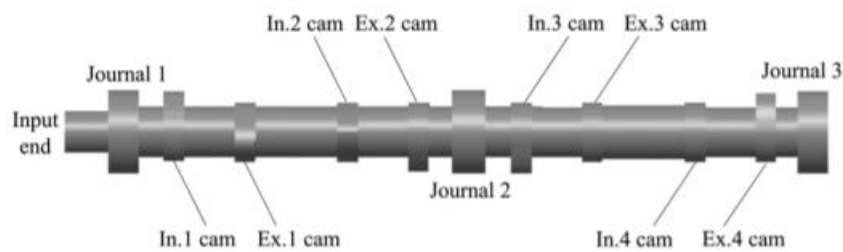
Schematic of a camshaft from a 4-cylinder diesel engine [Guo *et al.*, 2015]
